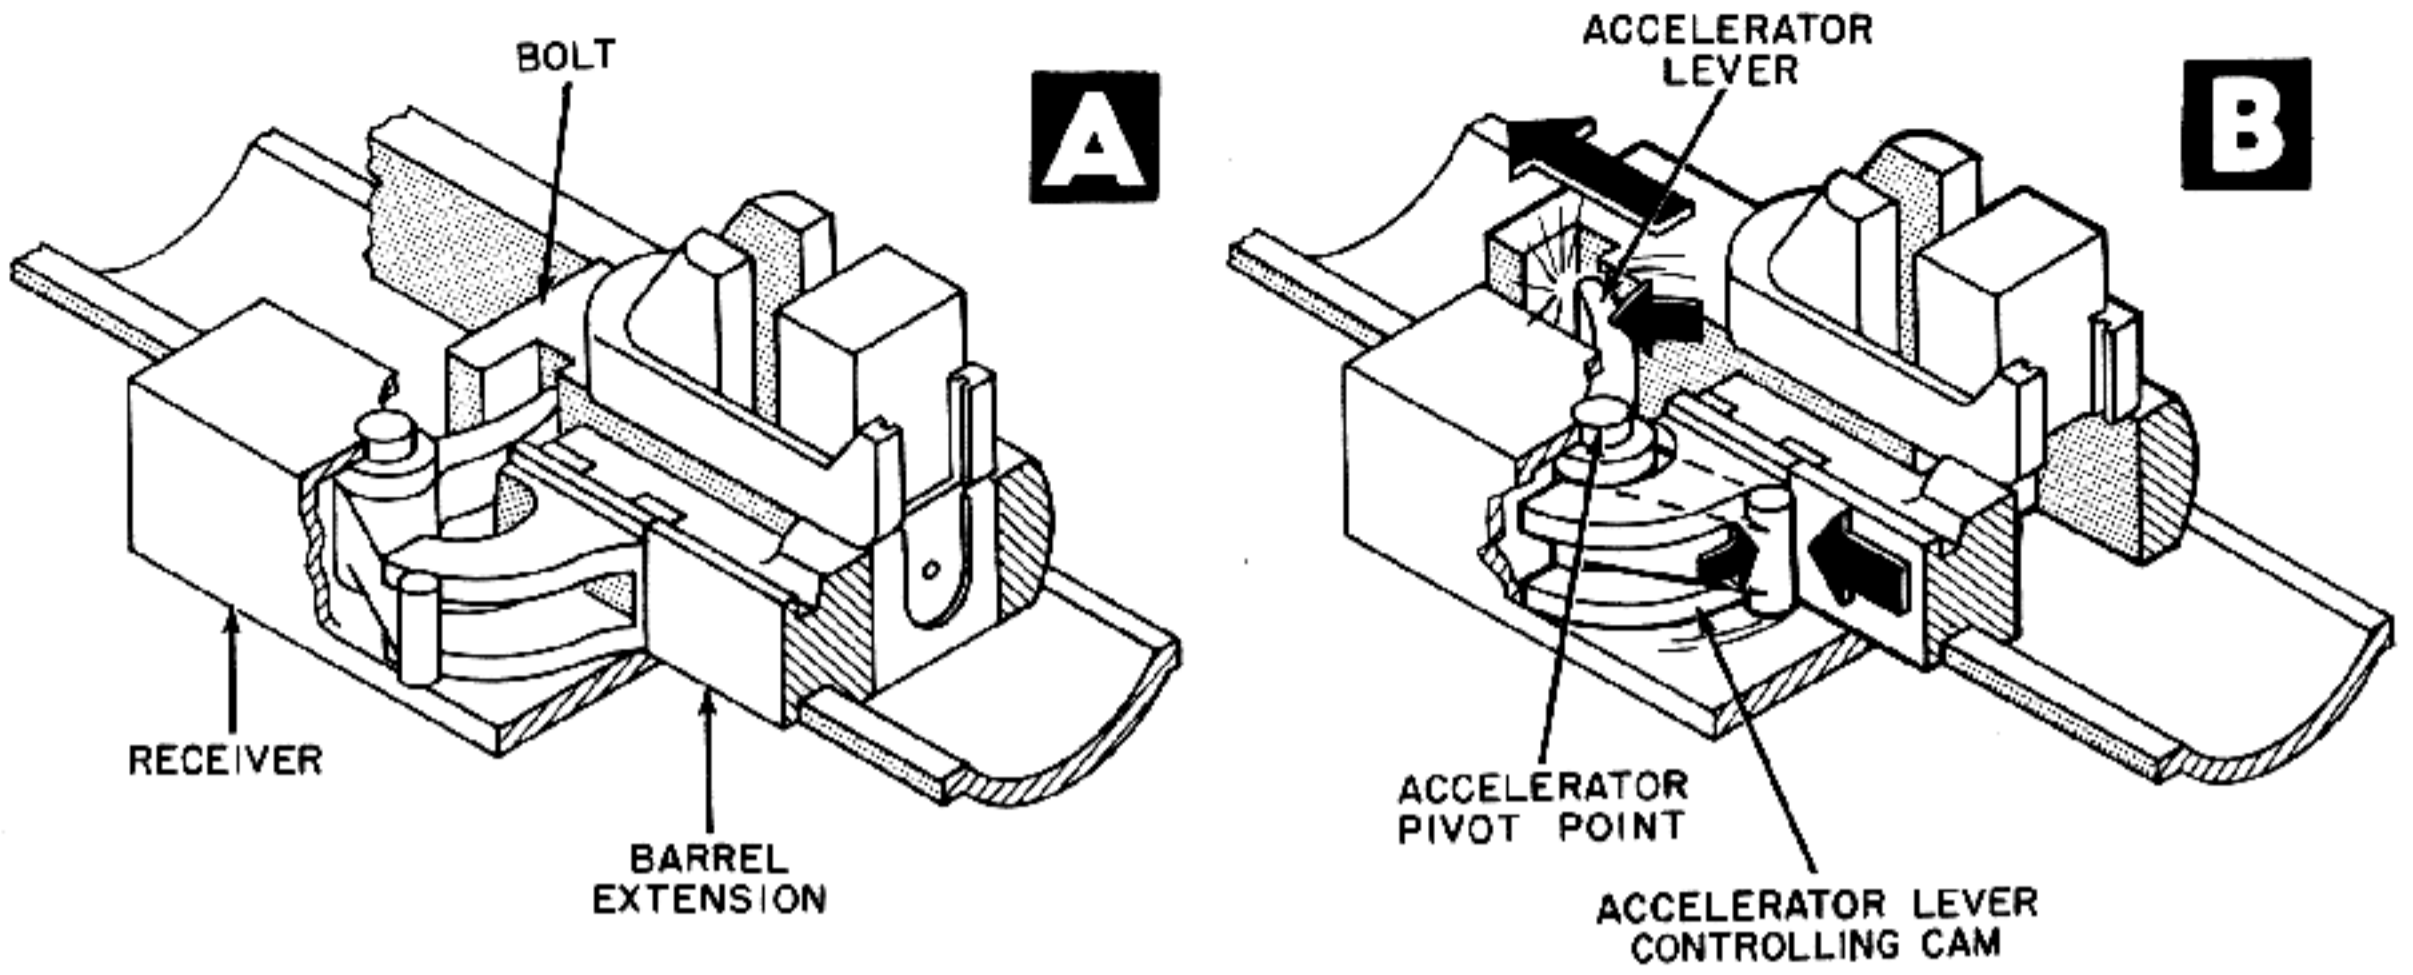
Pivoted Lever and Cam Accelerate Bolt to Rear.
